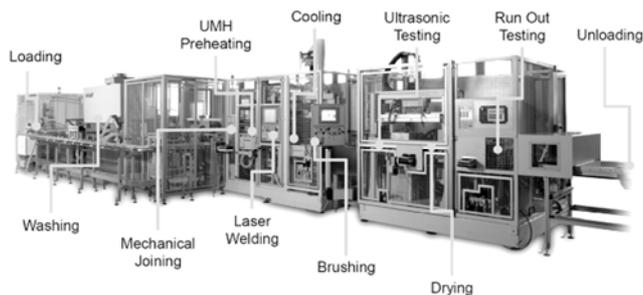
Automated laser welding plant GEARline made by pro-beam.
